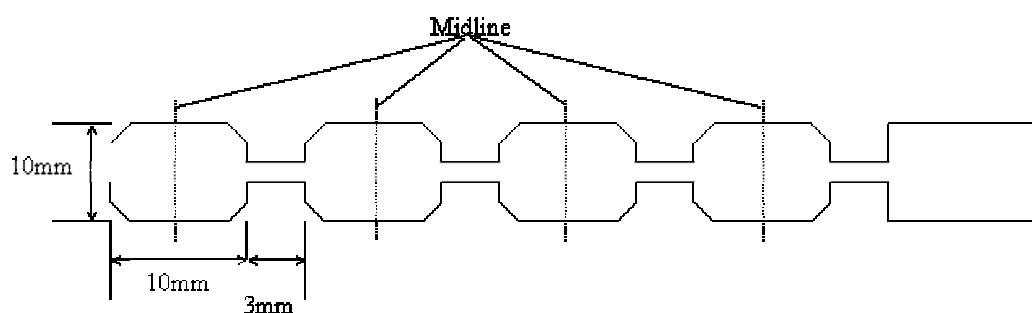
Schematic representation of the as-received specimen bar showing dimensions and the mid-line along which sectioning of the specimens was performed after testing.
